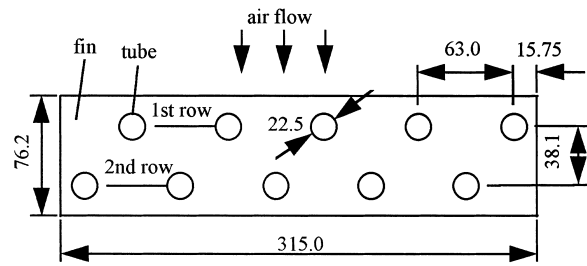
Basic geometry of a 3:1 scaled-up model fin, all dimensions in mm.
